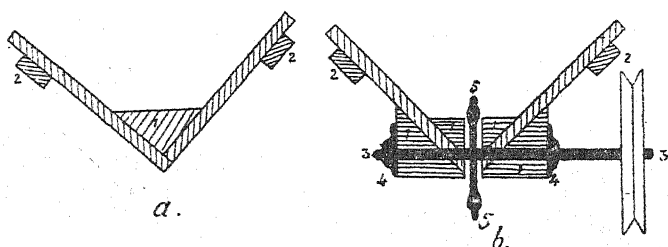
(a) Section of elevator; (b) top end of elevator; (1, 1) angle rails; (2, 2) battens; (3, 3) spindle; (4, 4) bearings; (5) sprocket wheel.
